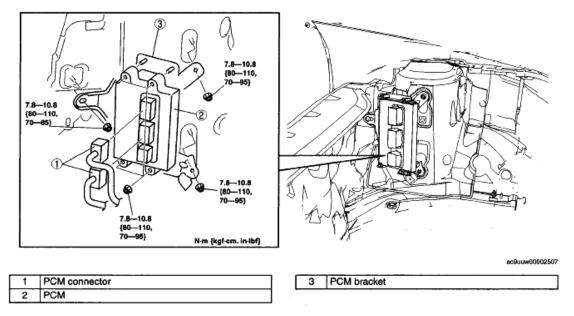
Identifying PCM Components With Torque Specifications Courtesy of MAZDA MOTORS CORP.
